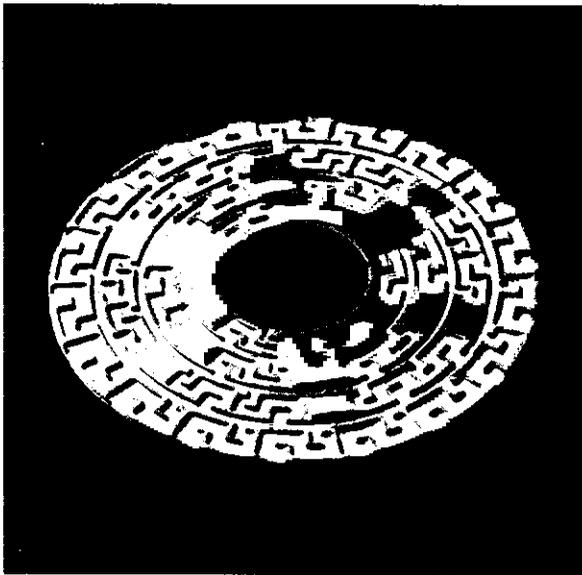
REDUCE VELOCITY OF FLUID FLOW AND USE QUIETER EQUIPMENT — QUIET PRESSURE REDUCING VALVE. The "Drag Valve" shown in the drawing at left and described on page 14 is a pressure reducing valve which can provide the desired pressure drop but at the same time limit the maximum velocity thru the valve to minimize the vibration and erosion and limit the noise reduction to most any desired level. The photograph at left shows a typical plate which illustrates the tortuous path the gas must take in passing from the inside (high pressure) to the outside (low pressure). For one design where 300 PSIG air was being vented to atmosphere, the noise reduction shown below was achieved as compared to venting through the more common orifice type valve.
